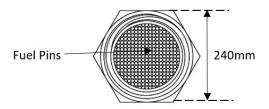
(a): Fuel Assembly containing 331 fuel pins
